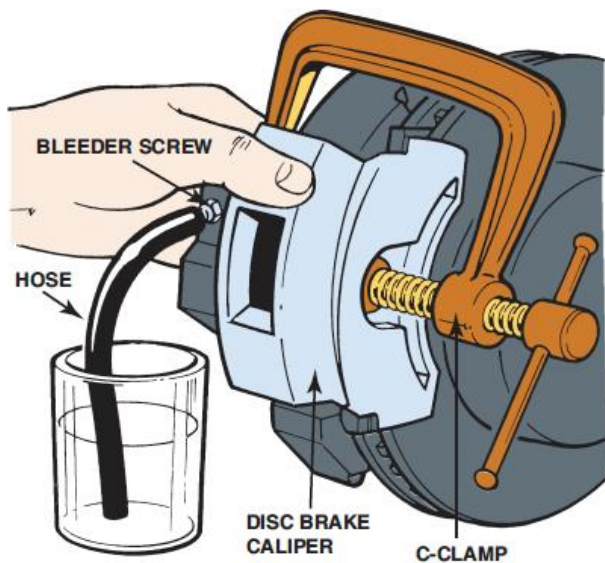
Push the piston into its bore while letting the fluid bleed into a container.
